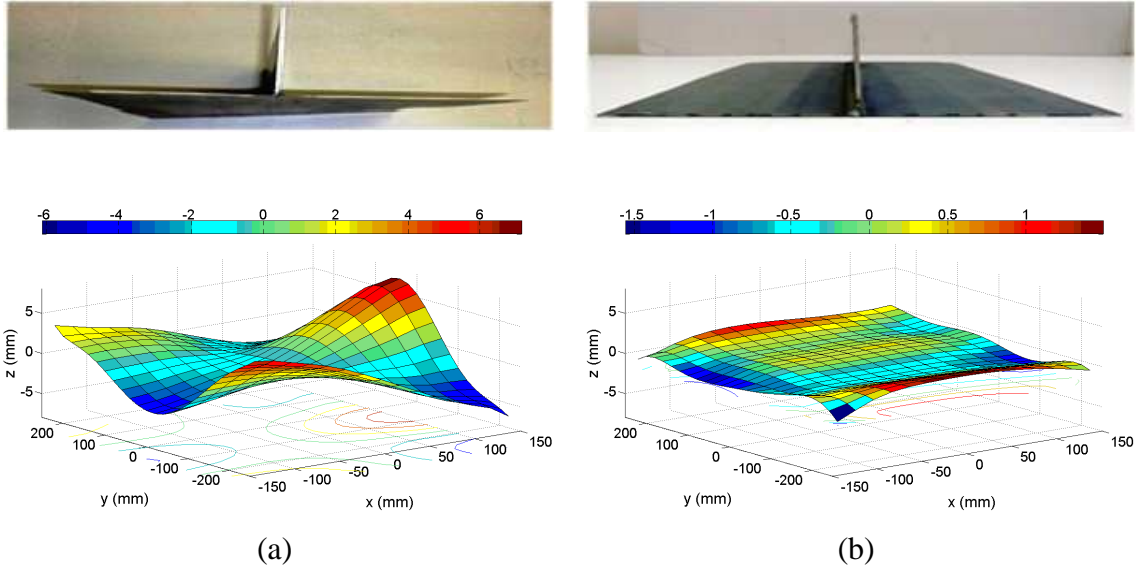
Iterative laser straightened fillet welded mild steel plate; (a) Distorted shape after welding; (b) Final shape after 8 iterations; Minimum threshold LE applied: $LE_{\kappa} = 22J/mm$, $LE_{\varepsilon} = 19J/mm$; Maximum threshold LE applied: $LE_{\kappa} = 80J/mm$, $LE_{\varepsilon} = 94J/mm$; $\eta_{\kappa} = 0.7$, $\eta_{\varepsilon} = 0.07$; (sample: LFI98, supplied by the Welding Engineering Research Centre at Cranfield University). The colour scale of the vertical z -deflection is in [mm].
